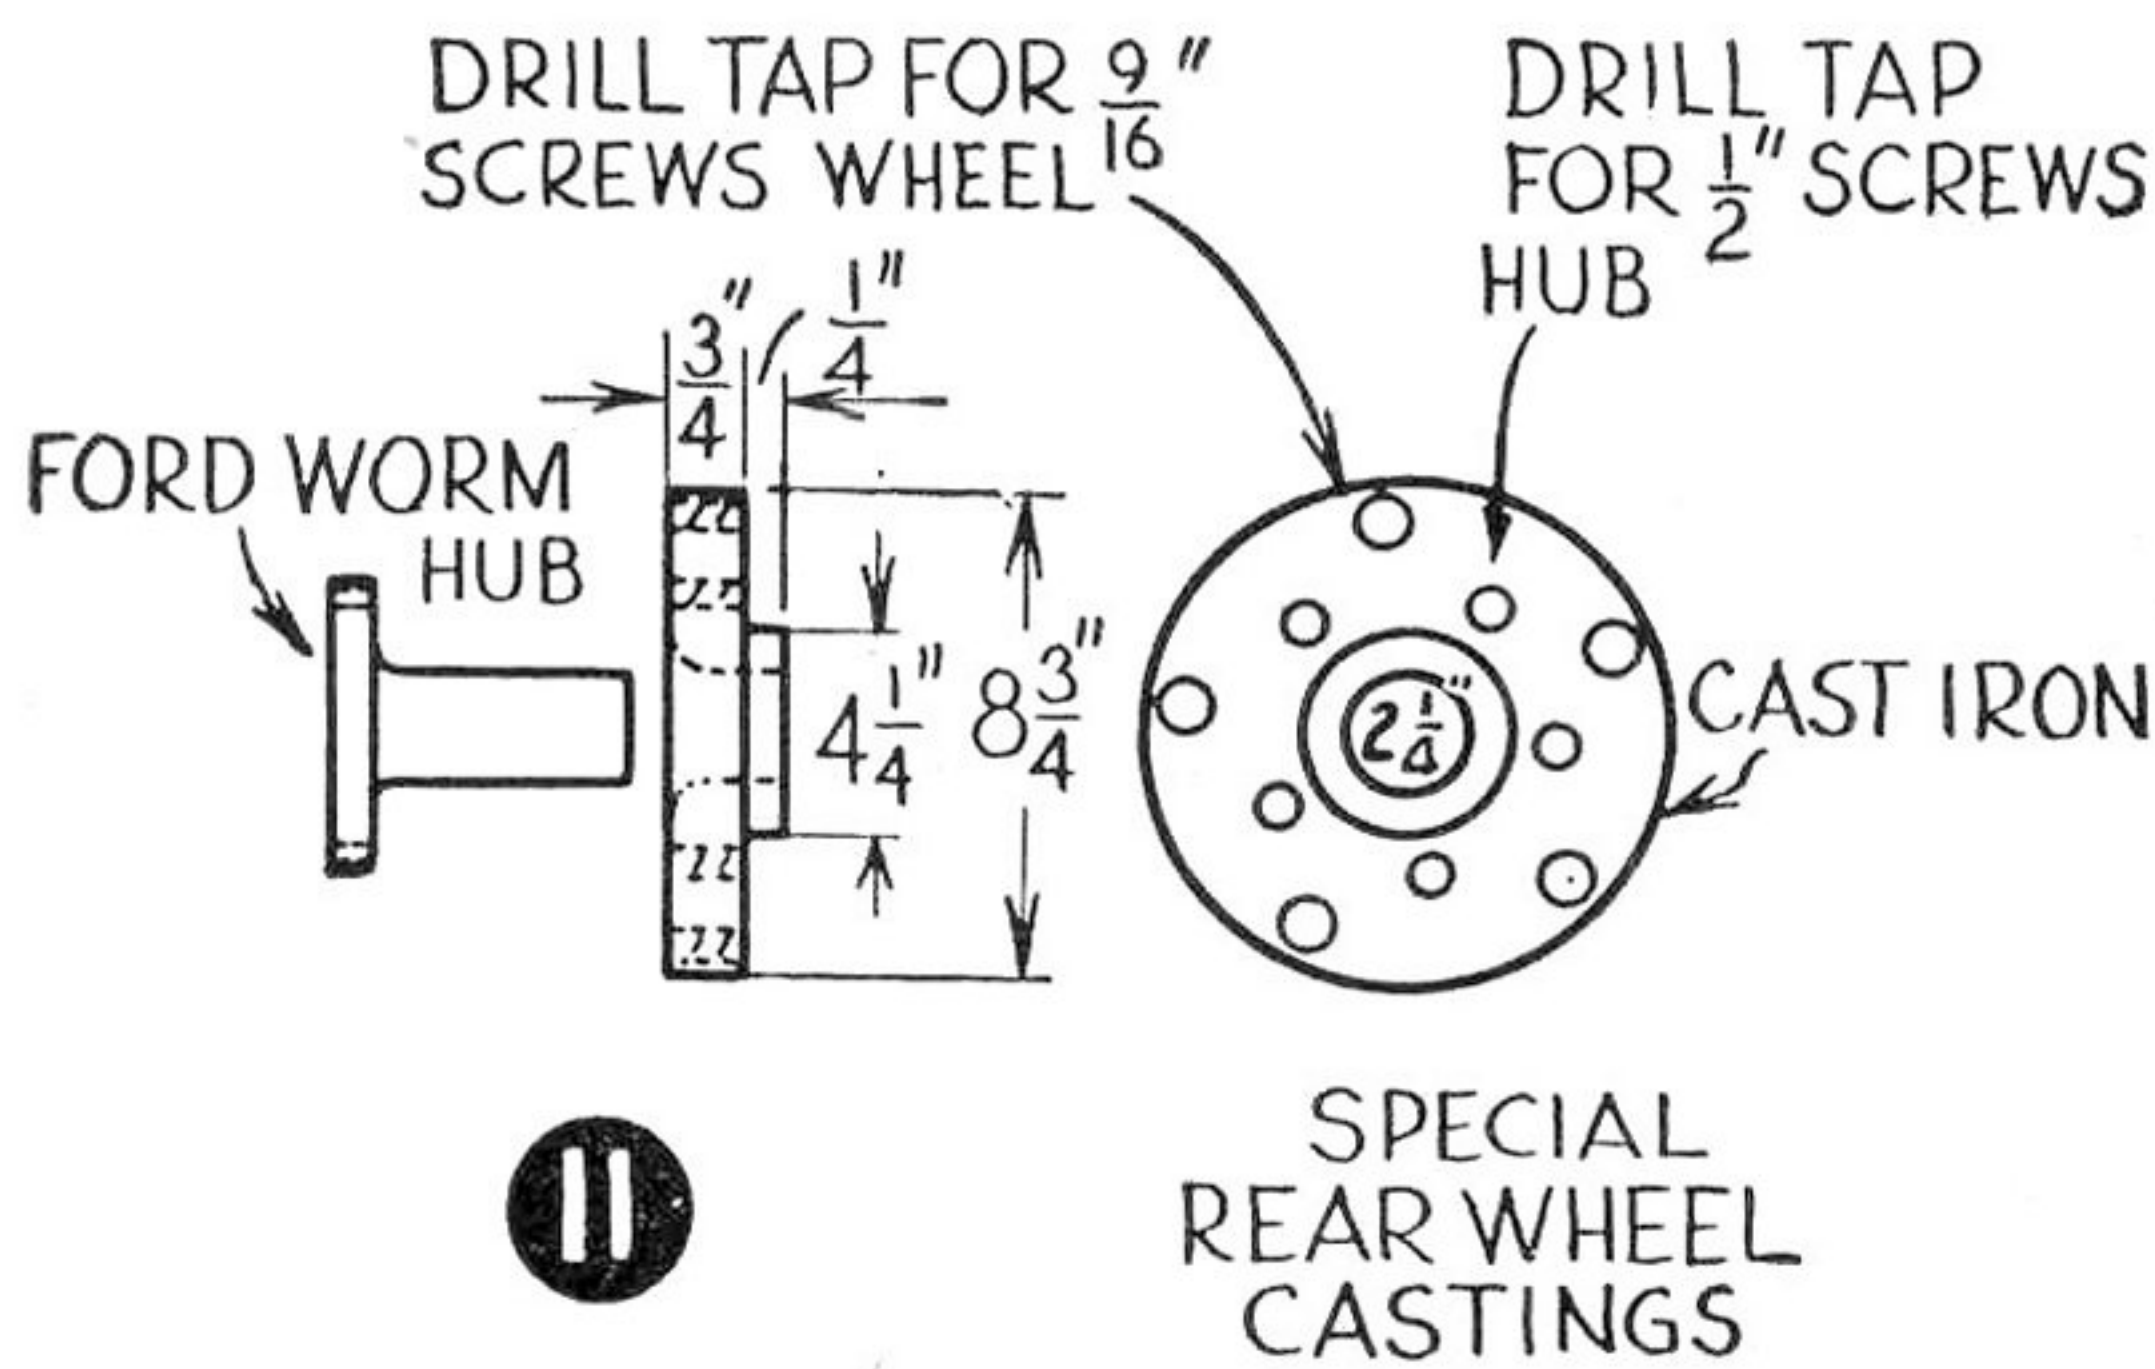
Special rear wheel castings to adapt Chevrolet truck wheels to the Ford truck axle hubs used with this tractor.
